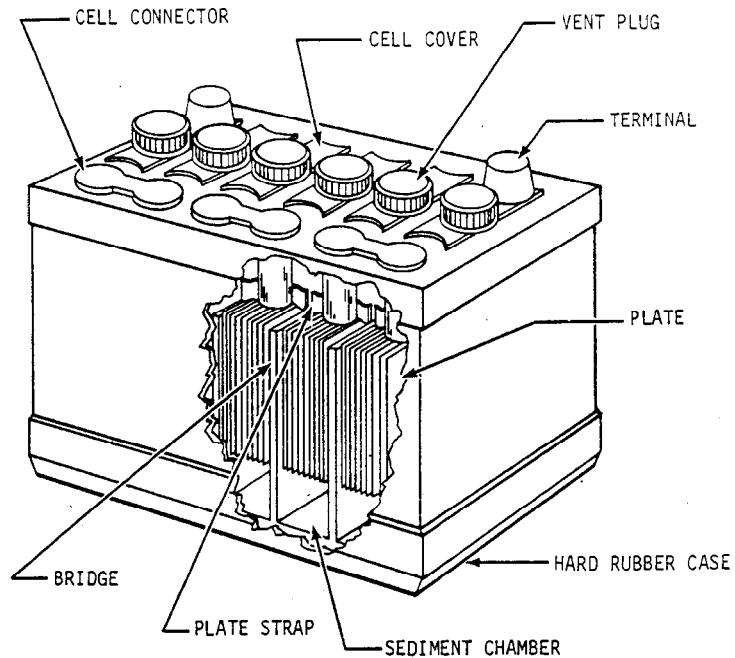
CONSTRUCTION DETAILS - TYPICAL BATTERY
